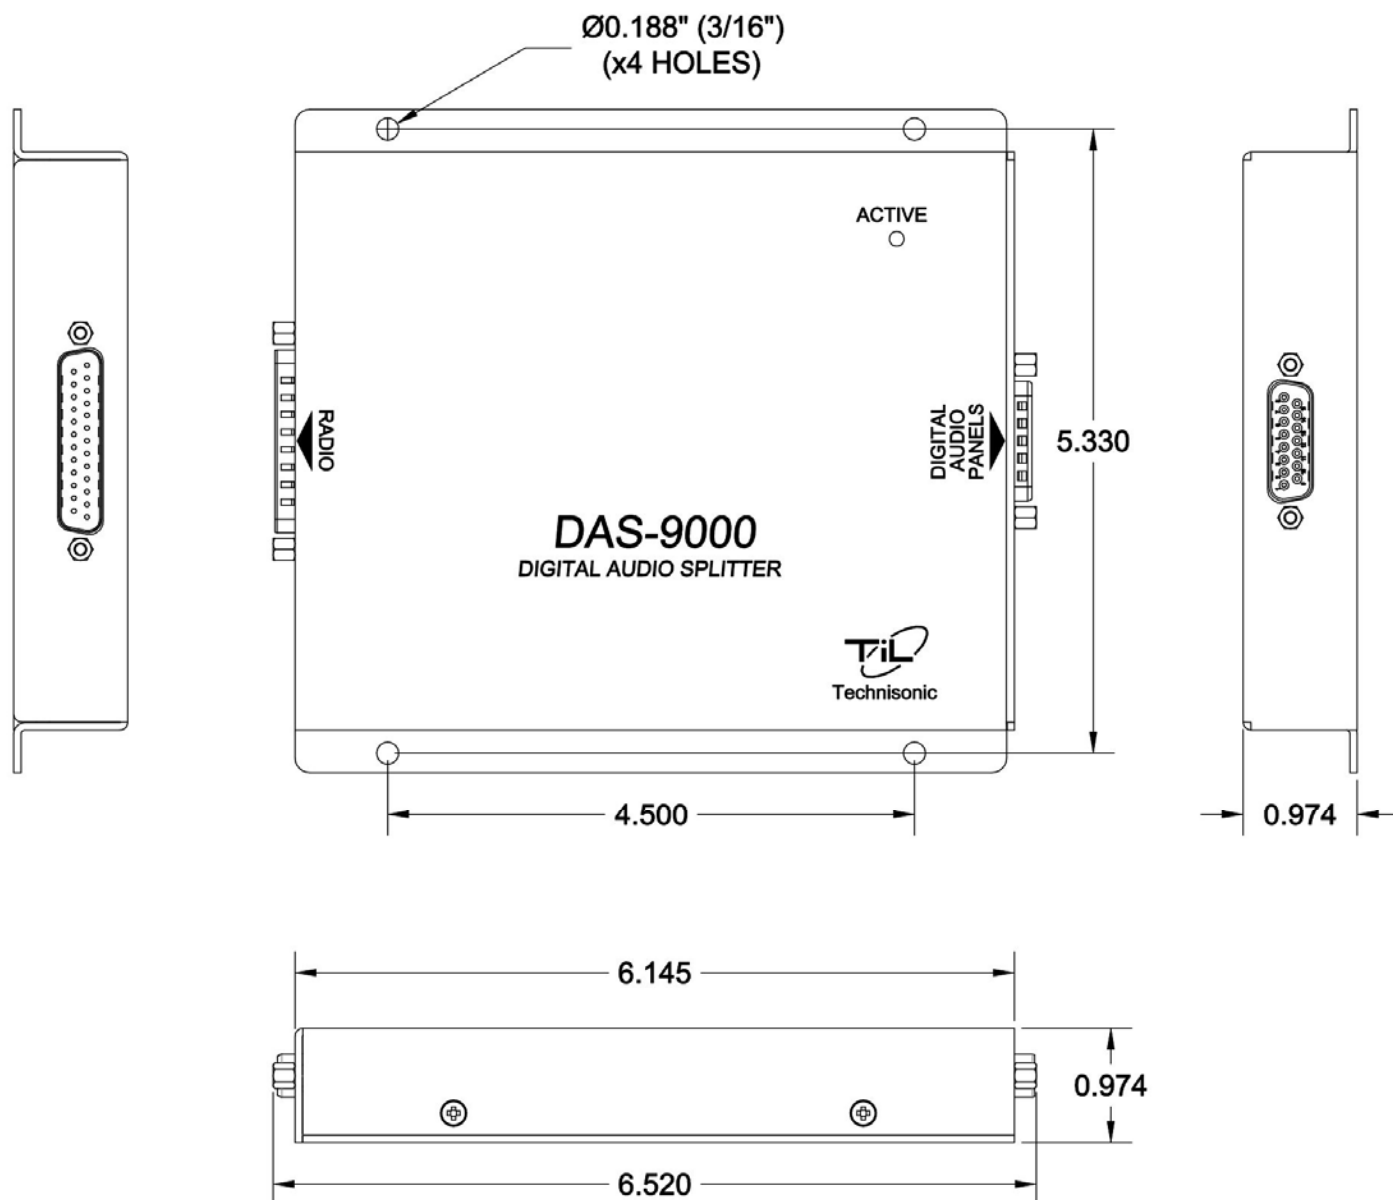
DAS-9000 Outline Drawing (Dimensions in inches)
